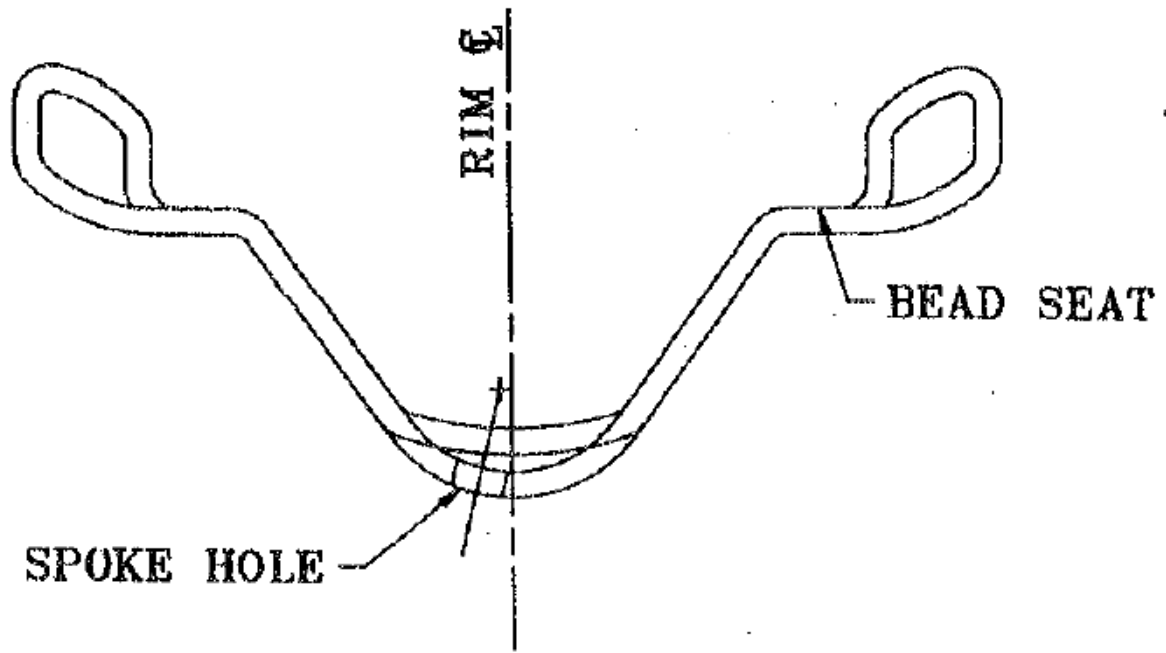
CYLINDRICAL BEAD SEAT RIM FOR MOTOR CYCLES
